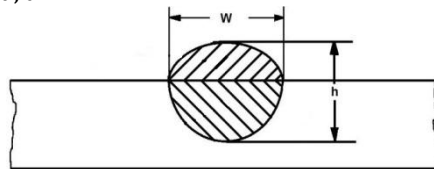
Weld bead geometry, W-width of bead, h-height of bead
